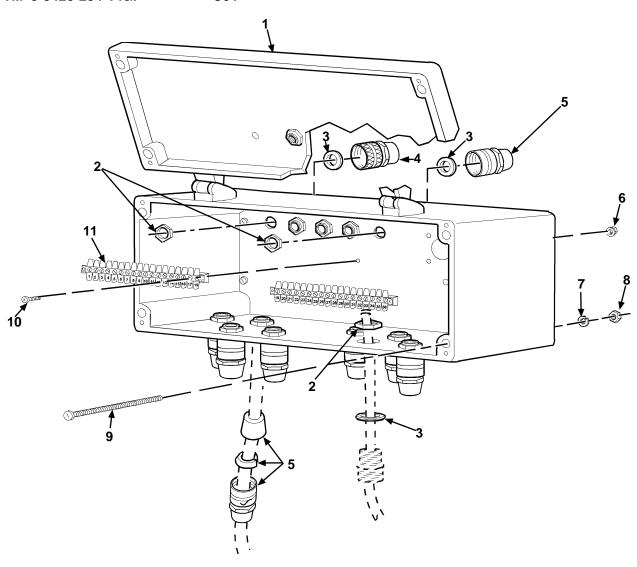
Hydraulic Cover Assembly and Related Parts (Model A Only)
